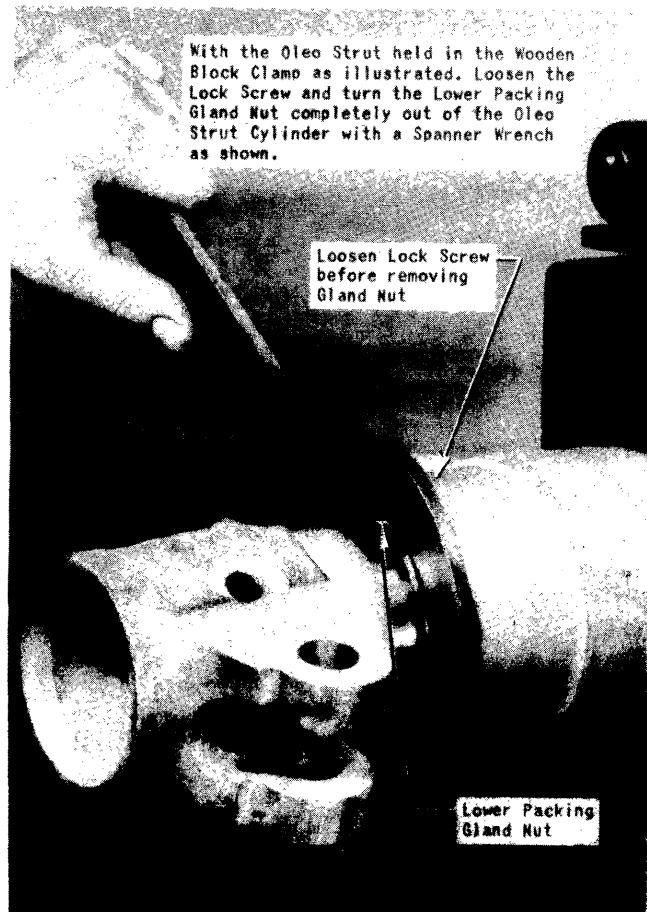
Removing Lower Packing Gland Nut from Oleo Strut Cylinder
